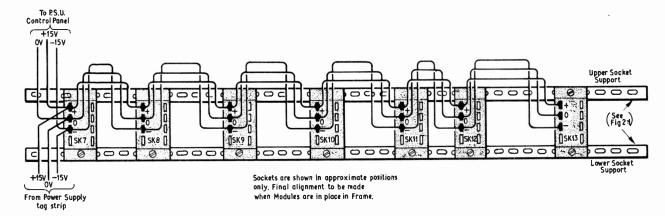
Socket arrangement and wiring on connector mounting rails
